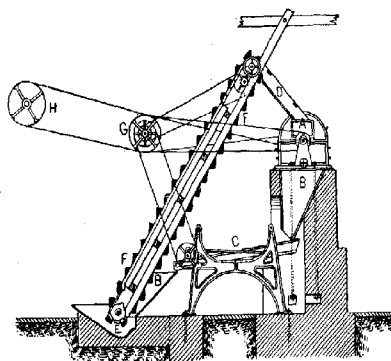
Carr's Disintegrator or Toothed Crusher. C. Sieve. F. Elevator. G. H. Transmission Shafting.
